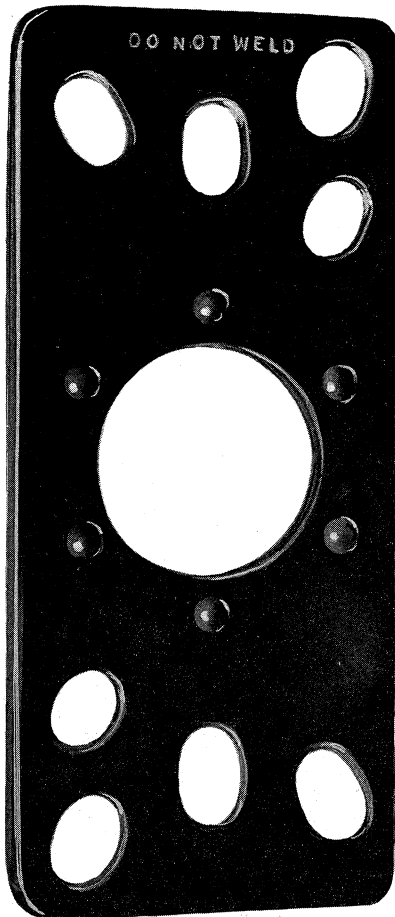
Drive Tool, A.B. Chance (Alternate)
